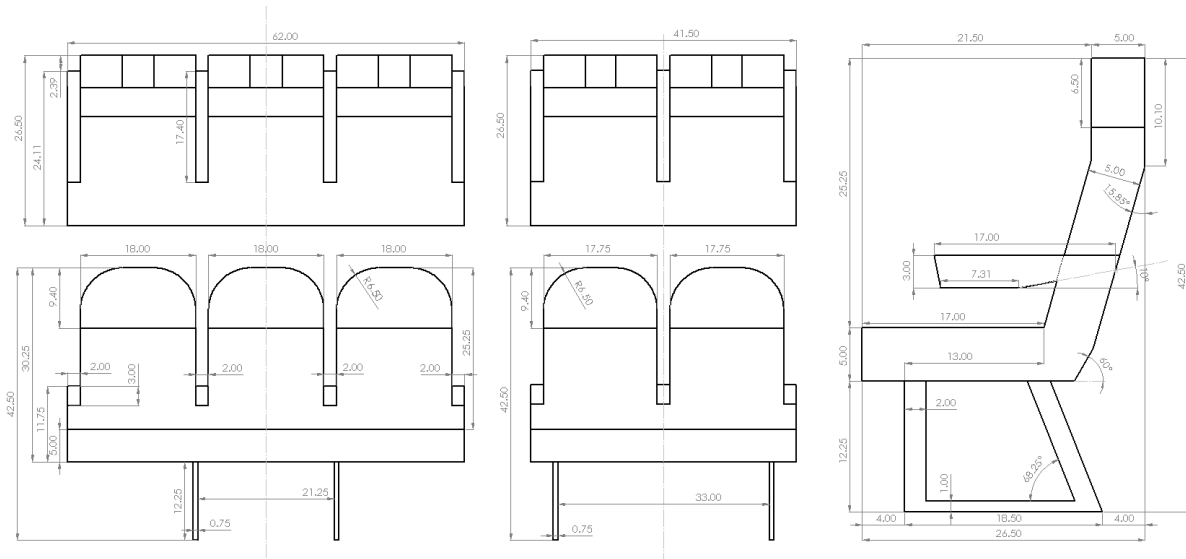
2D Drawings with dimensions of seats. Dimensions in inches.
